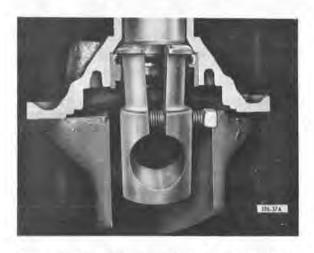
Cutaway Detail of Installed Remover and Cover in Press Set-Up
